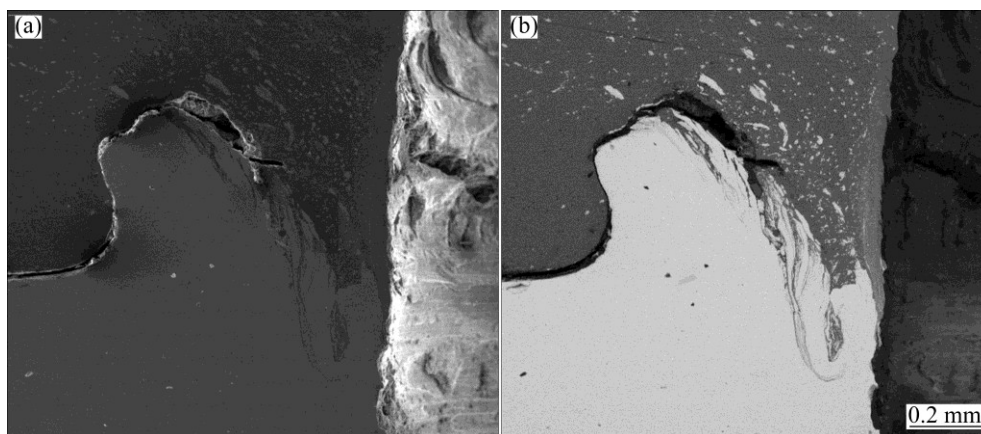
Secondary electron (a) and backscattered electron (b) images of spot weld produced at 800 r/min and 0.5 mm plunge depth using flat pin and flat shoulder tool
